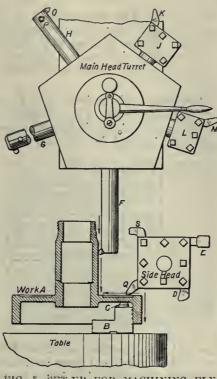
SET-UP FOR MACHINING FLY-WHEEL FULLEY,
